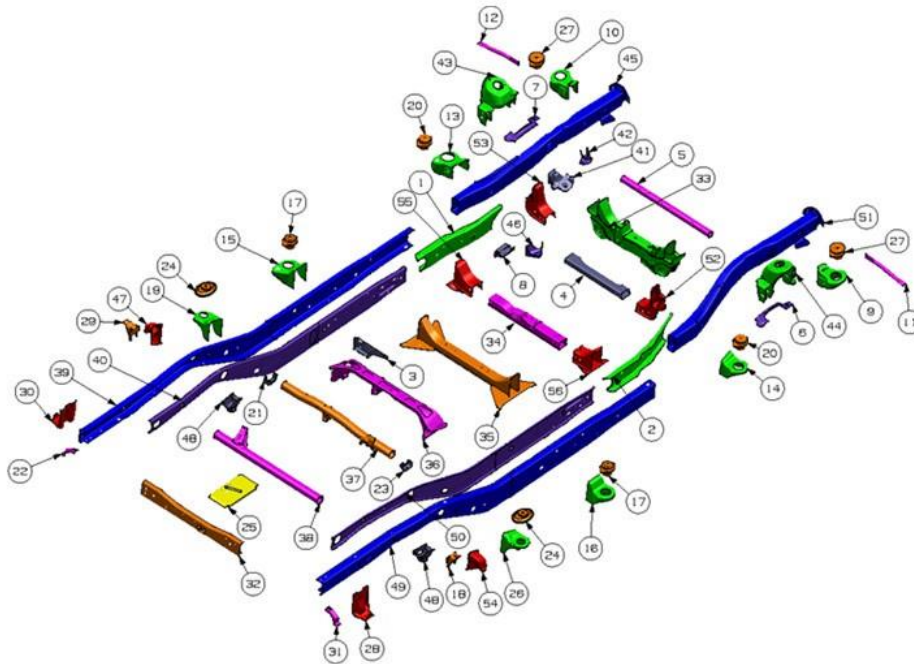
Baseline Chevrolet Silverado Frame Exploded View
